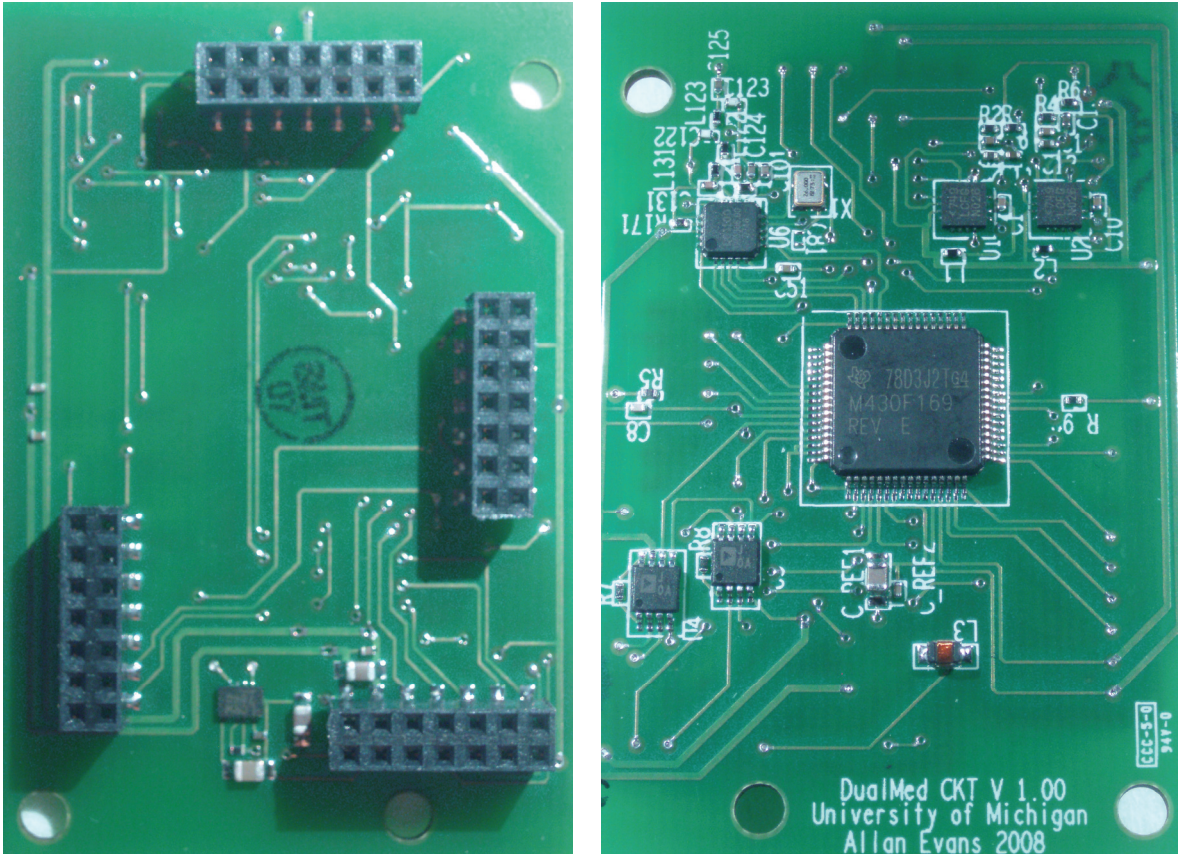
Photographs of the populated DualMed v1.00 board taken from the bottom (left), and the top (right). The bottom has the connector ports for interfacing the board with everything else.
